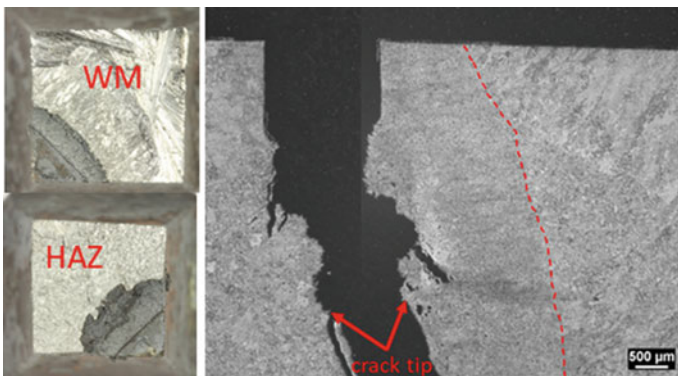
Fracture surfaces and microsection of HAZ crack
